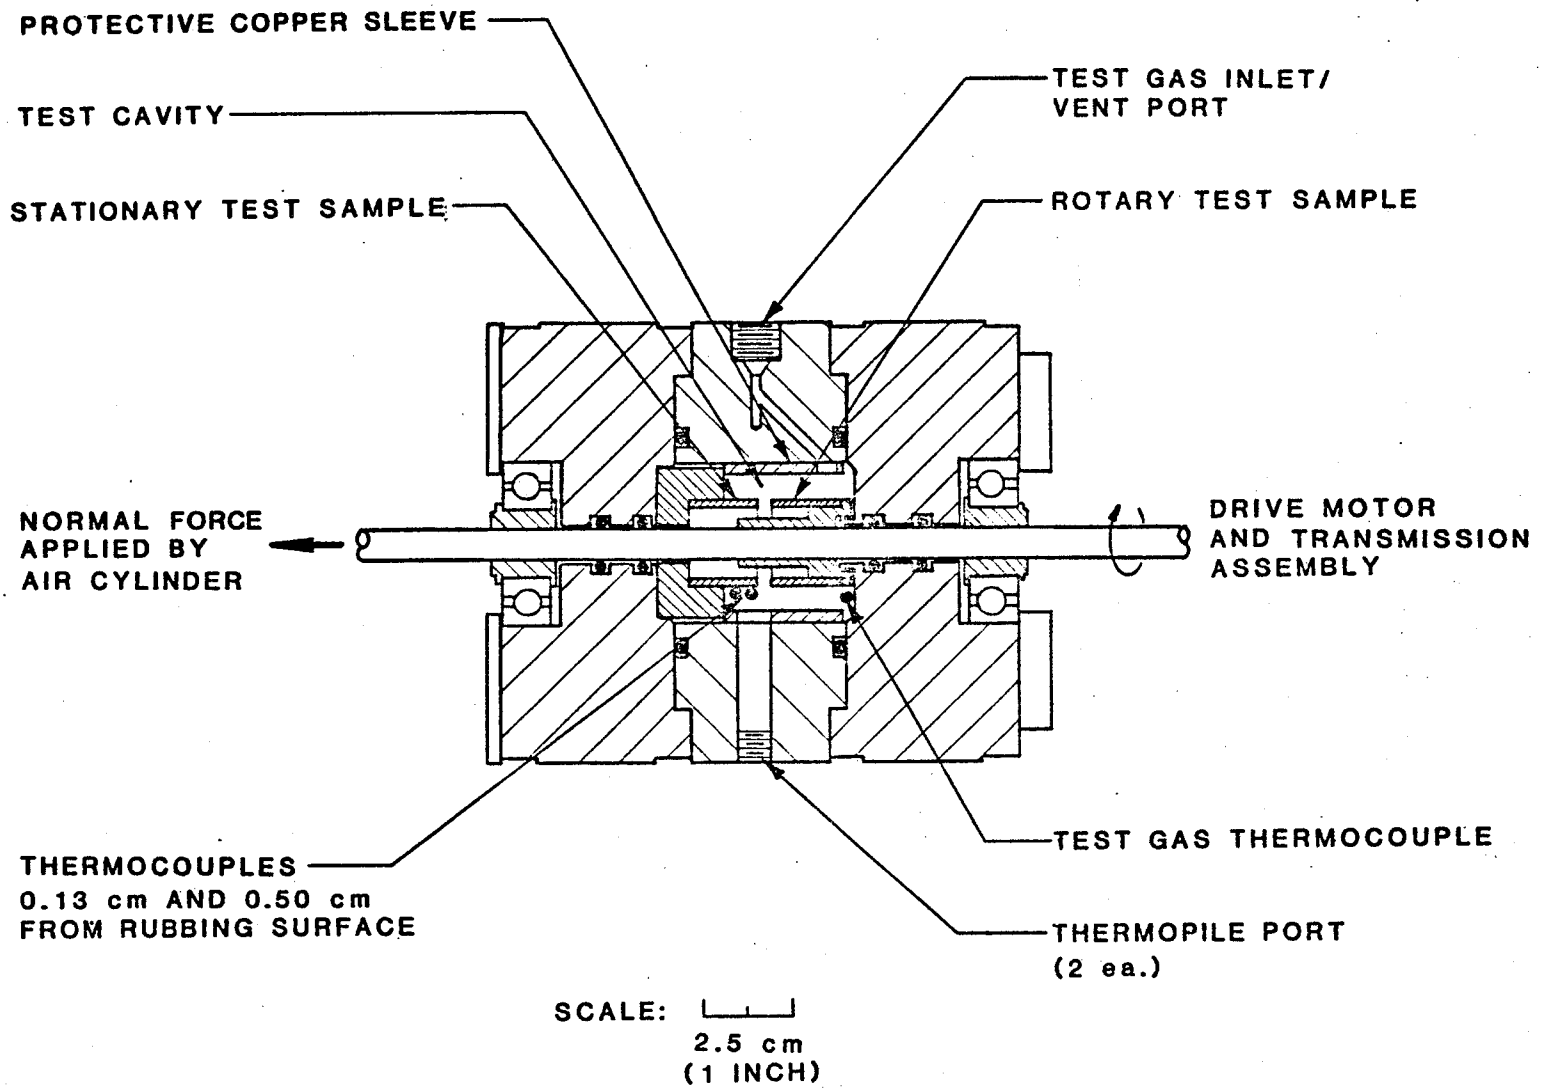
Cross-Sectional Side View of Frictional Heating Test Chamber
